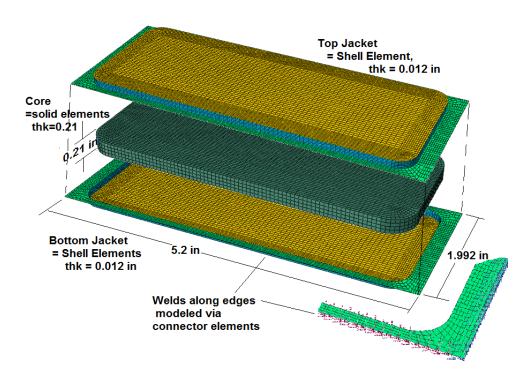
View of GEAP Type ZPPR Plate Assemblies
